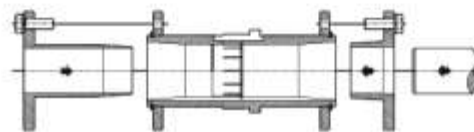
Short Shaft Bushing and Output Hub Assembly
